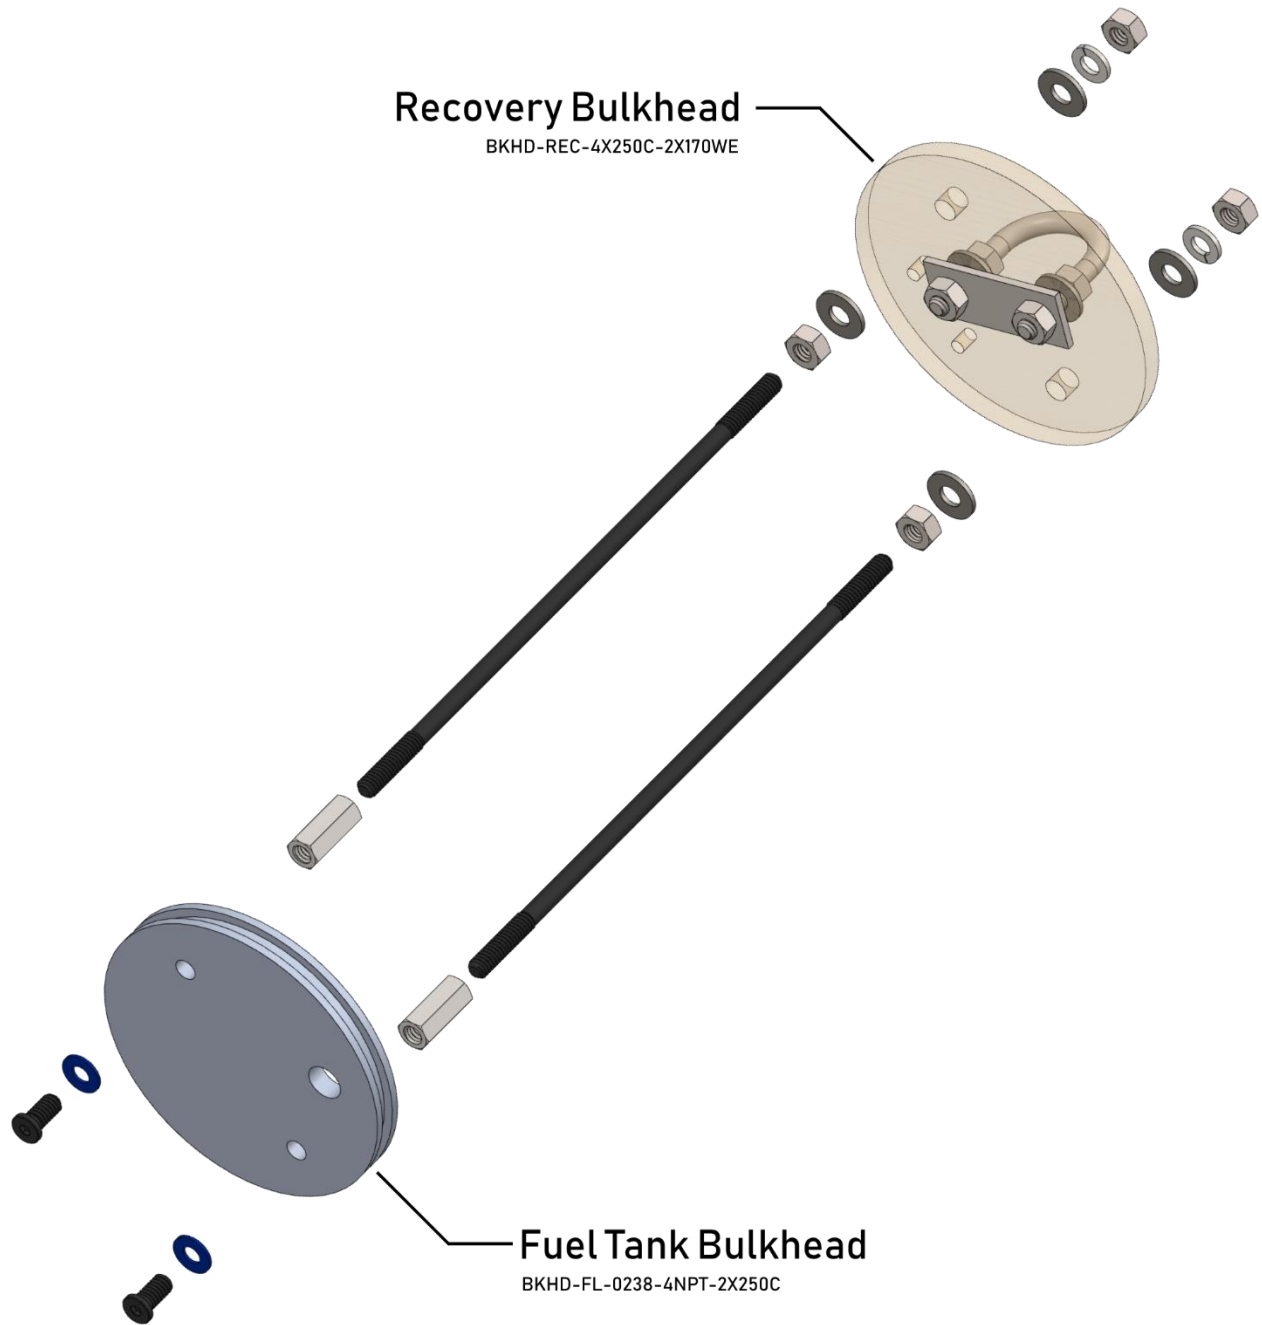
Exploded-view diagram of the Mojave Sphinx forward bulkhead assembly's recovery mounting components
